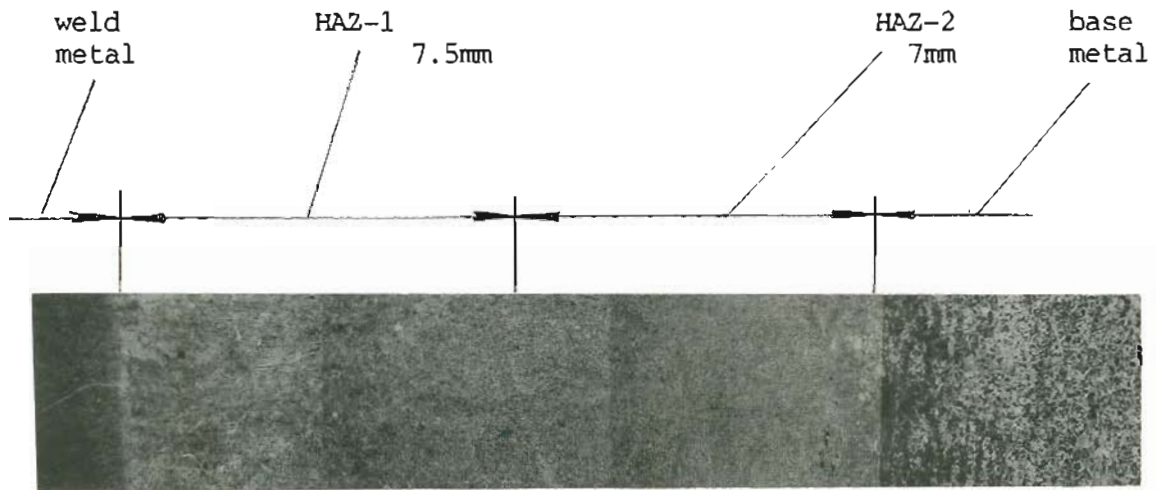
Typical HAZ morphology of A36 ES welds deposited With 25p filler metal. (Weld # 5B-2)
